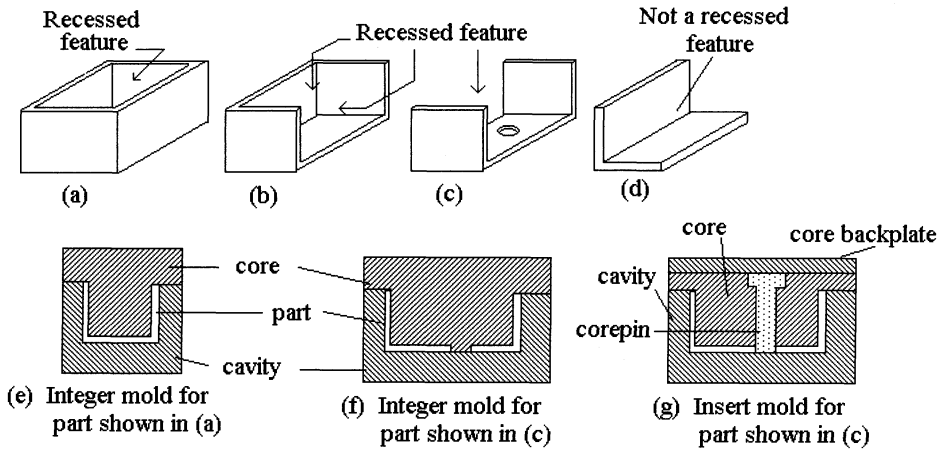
Examples of parts with recessed features and section views of the molds used to produce them.
